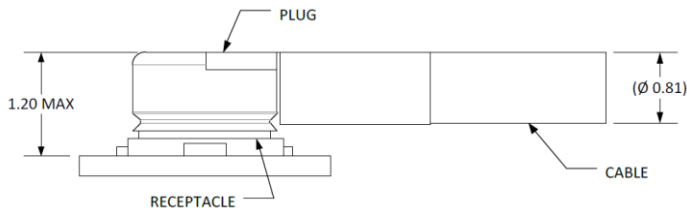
Connection between RF Connector and Mating Plug Using $\varnothing 0.81$ mm Coaxial Cable
